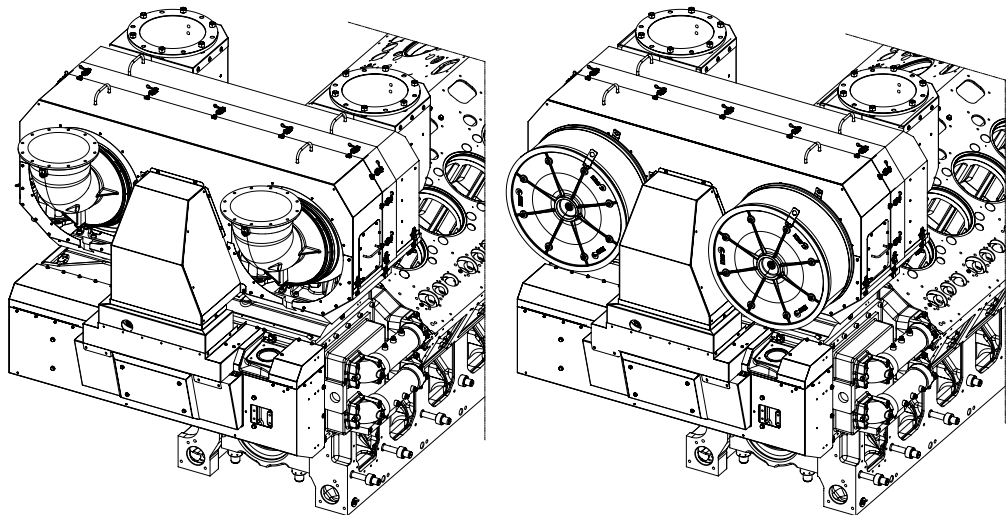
Exhaust outlet possibilities, 16V-engine
